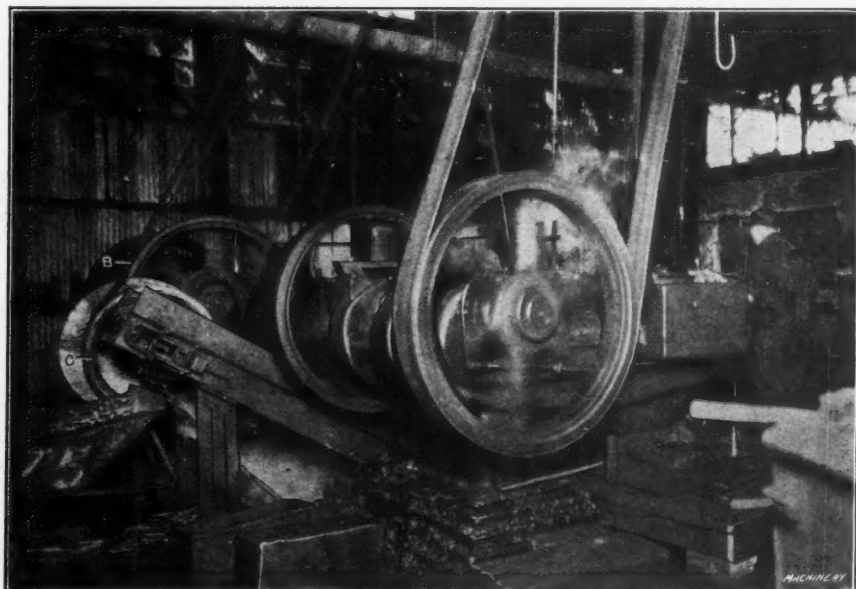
Rear View of a Pair of Acme Forging Machines, built by the Acme Machinery Co., Cleveland, Ohio, showing Methods of conveying Bolts from Machine to Wheelbarrow
